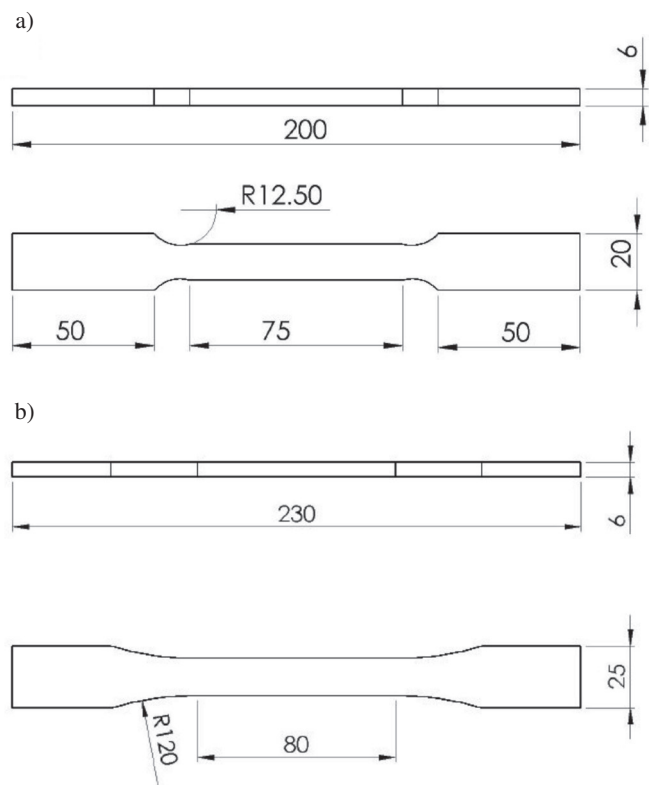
a) ASTM E8M standard test specimen for tensile testing; b) ASTM E0466 standard test specimen for fatigue testing
